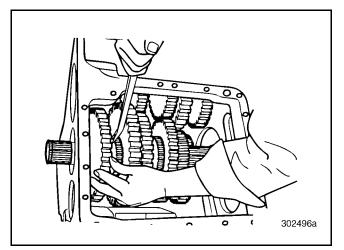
Sliding First/Reverse Sliding Clutch and Reverse Speed Gear to Engage Gear Teeth
